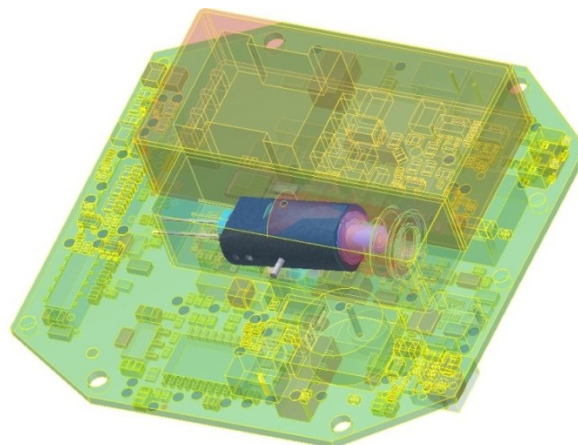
Fibre coupler mounted inside the MiniFaros PCB Laser.
